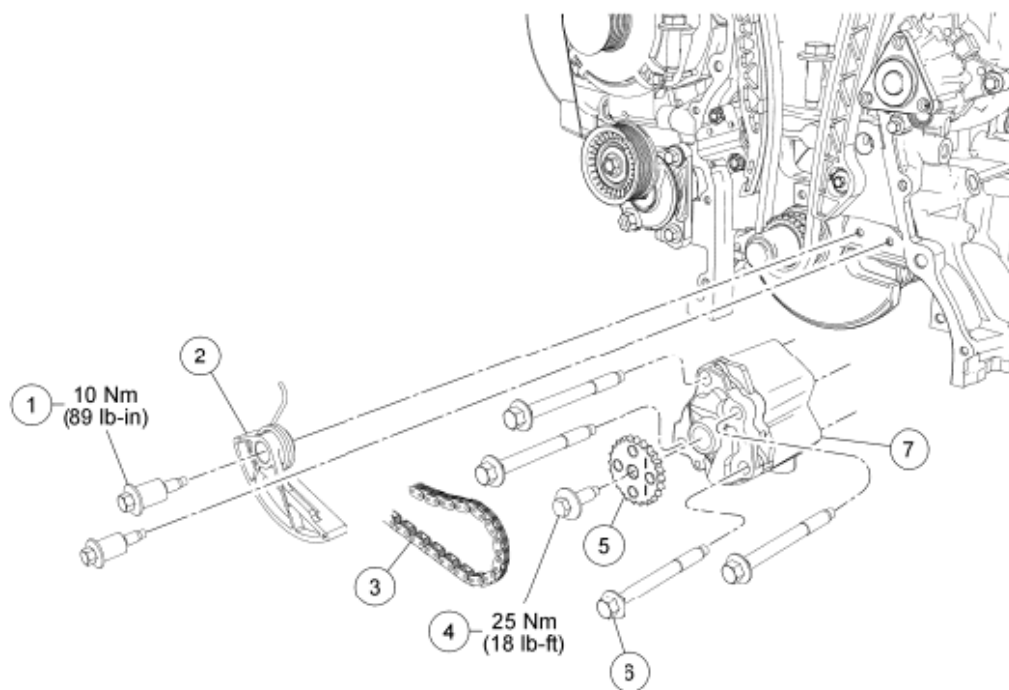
Identifying Oil Pump Components With Torque Specifications
